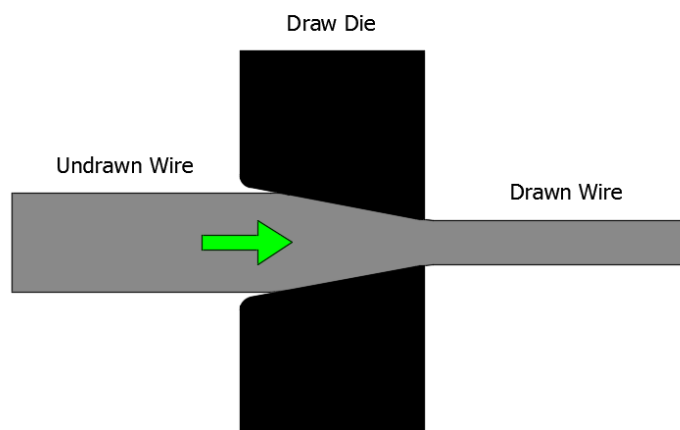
Simple illustration of the drawing process where a rod goes through a drawing die.
